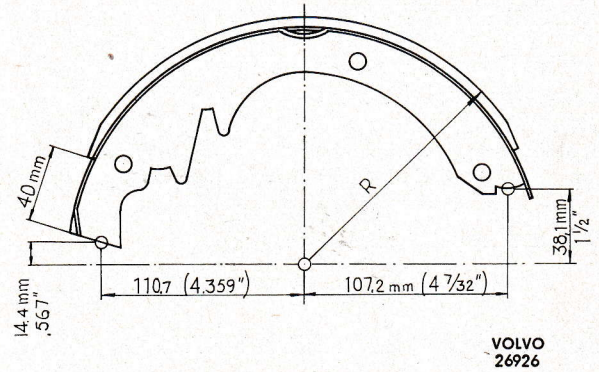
Adjusting measurements for brake shoe, front wheel.
